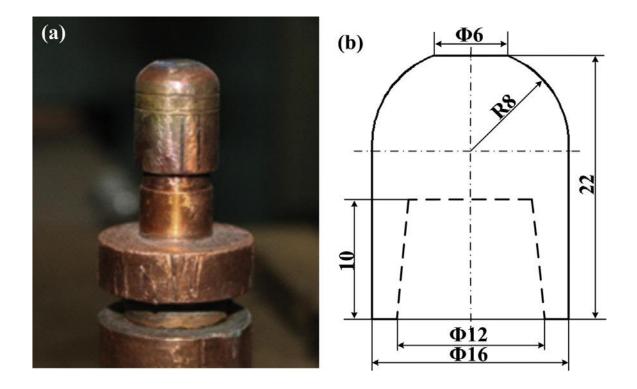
Electrode shape (a) and geometry dimensions (b).
